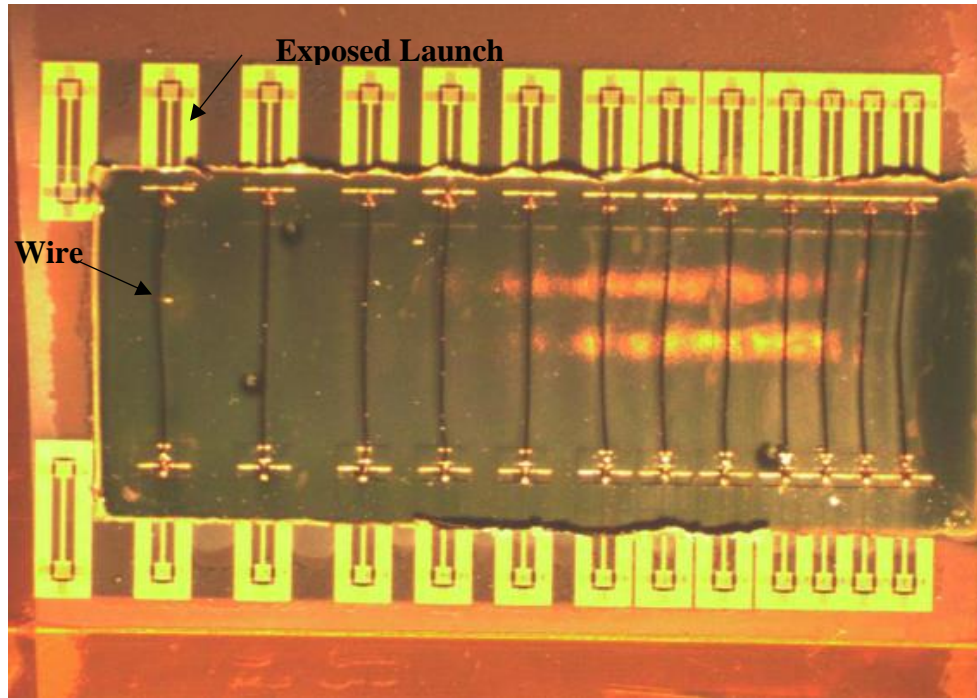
Microscope image of RF board with 12 microcoaxial cables after fabrication.
